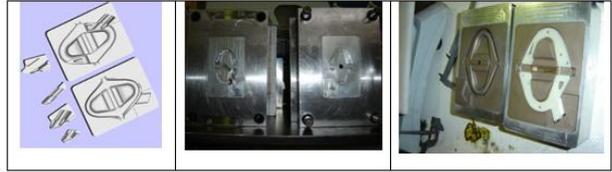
Design of inserts, Aluminium machined inserts and DMLS produced inserts
